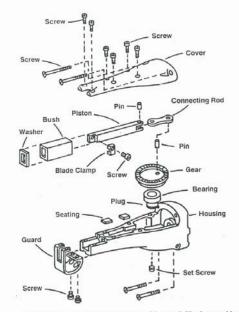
Power saw (new design-29 parts, 2.58 min assembly time). (After Ref.
